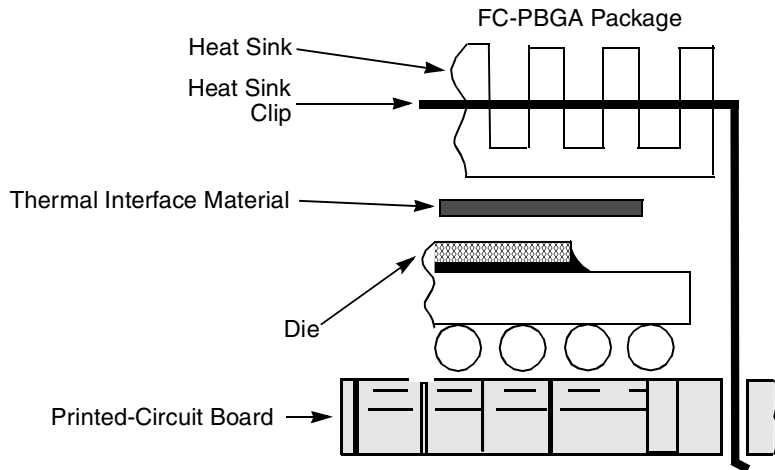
Package Exploded Cross-Sectional View with Several Heat Sink Options
